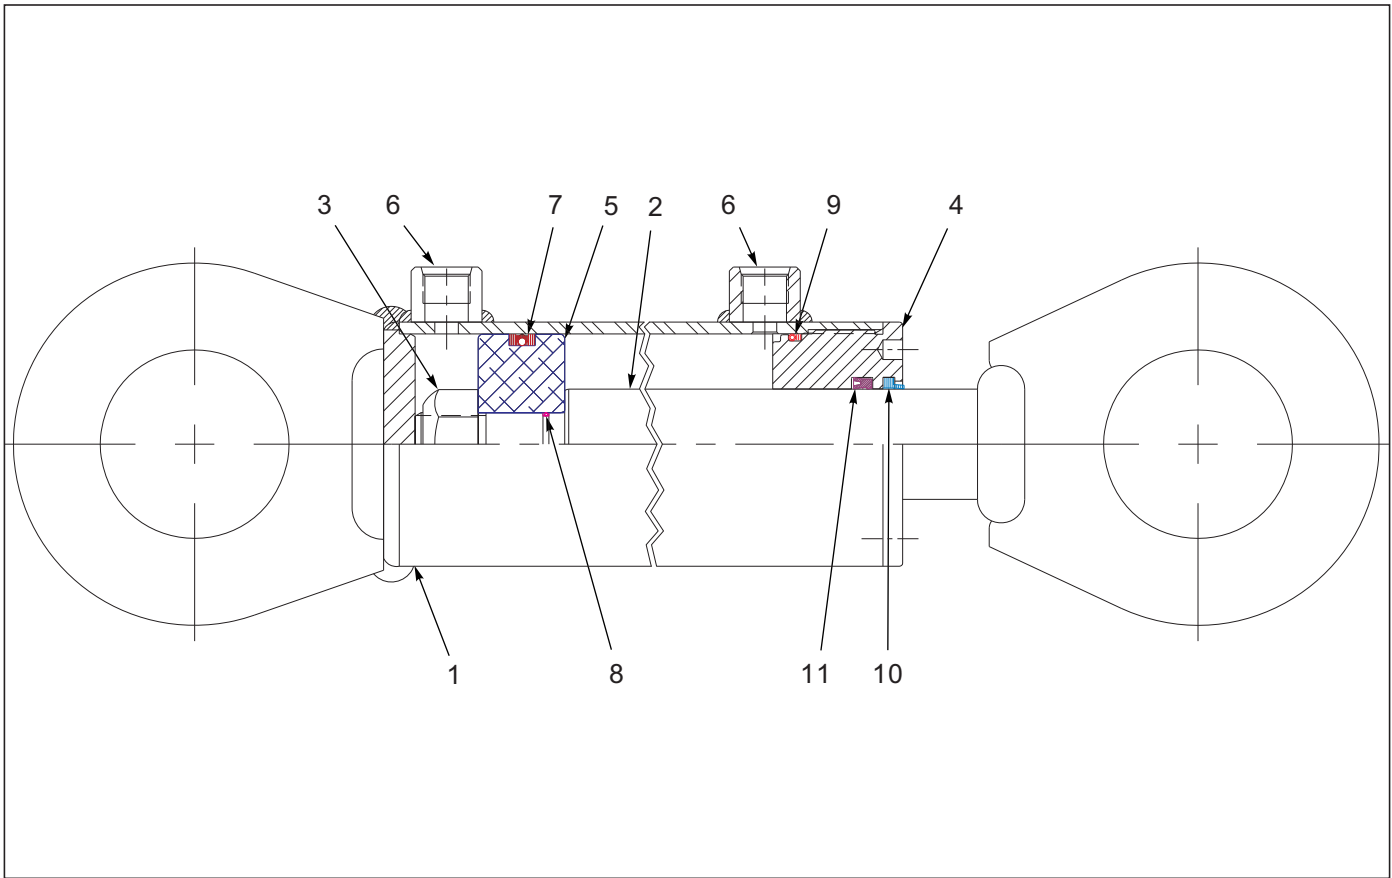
Cylinder Assembly - 3-1/2 X 20
